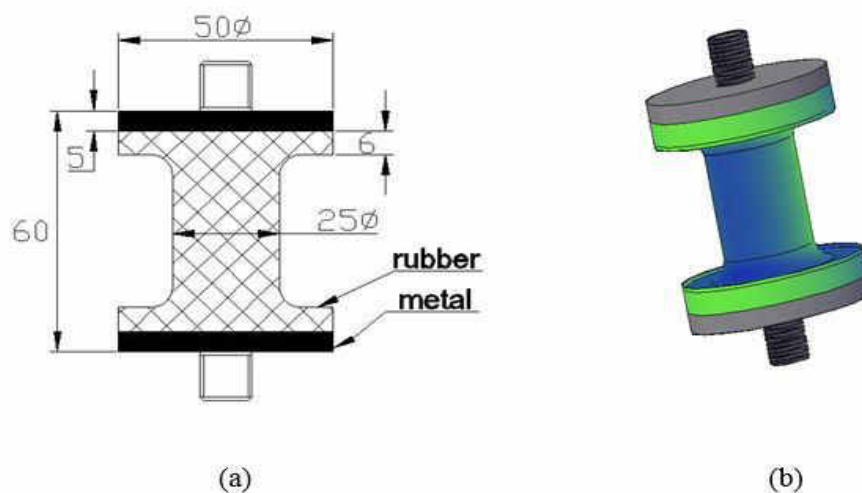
Diabolo test specimen: (a) main dimensions, (b) isometric view.
